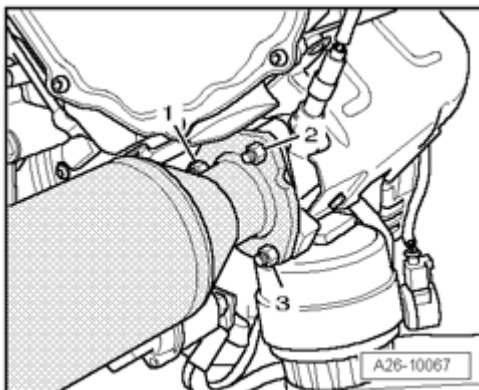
Removing Nuts & Right Front Exhaust Pipe With Catalytic Converter
